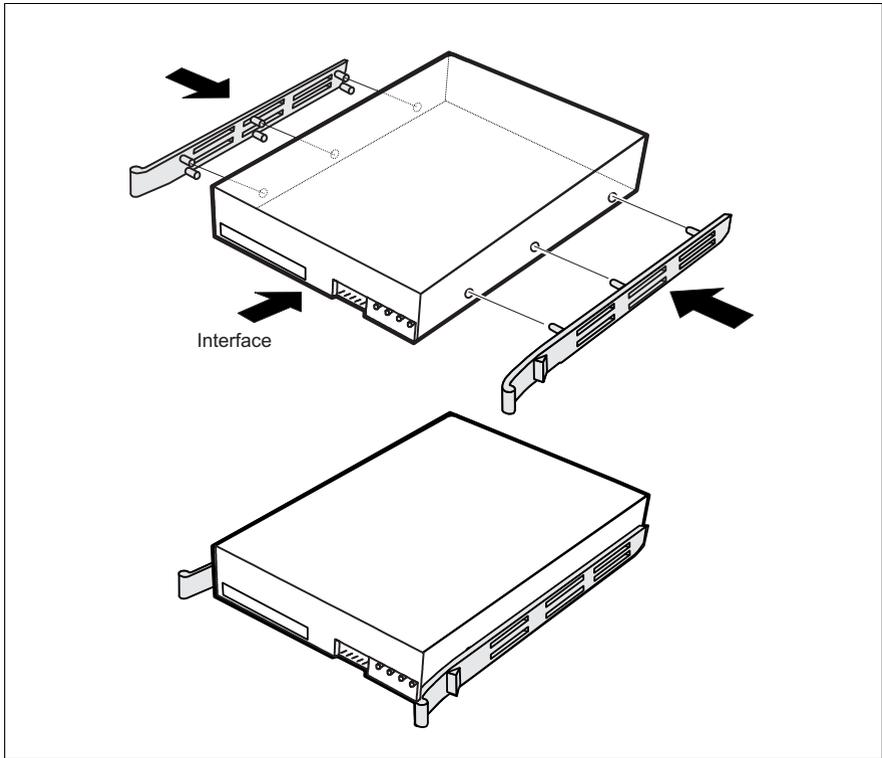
Attaching the rails to the hard disk drive (SATA hard disk drive)
